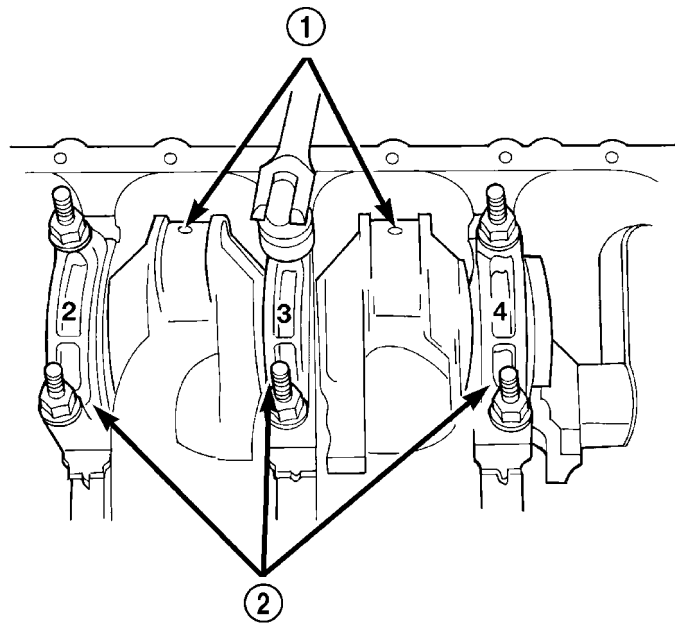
Removing Main Bearing Caps and Lower Inserts
